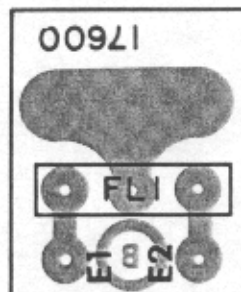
Part 17600 Filter Board (A2A2), Location of Components
